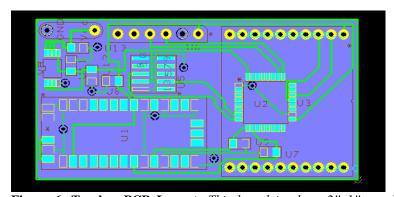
Tracker PCB Layout. This board is about 2"x1", small enough to fit in the nose cone without creating any inconsistency between it and the body tube.
